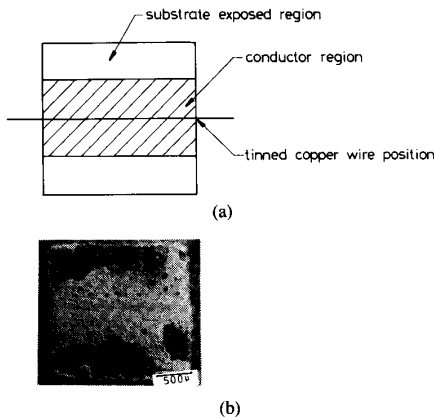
Top view of a typical fracture surface in the substrate side.
